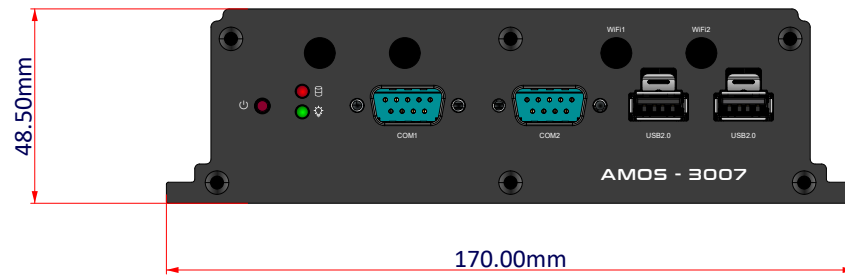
Dimensions of the VIA AMOS-3007 (front view)
